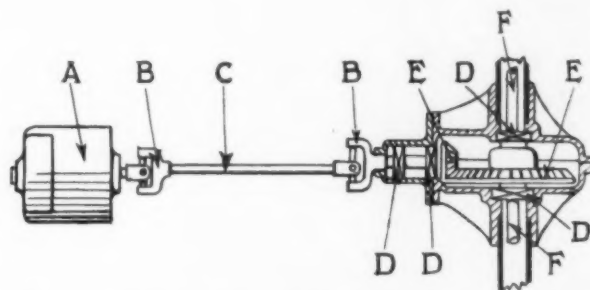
A, motor; B, B, universal joints; D, D, D, D, bearings; E, bevel pinion; E', bevel gear; F, F, countershaft spindles
